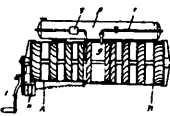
Guillaume, 1921. Part of the combustion chamber energy is used to drive a gas-turbine compressor
